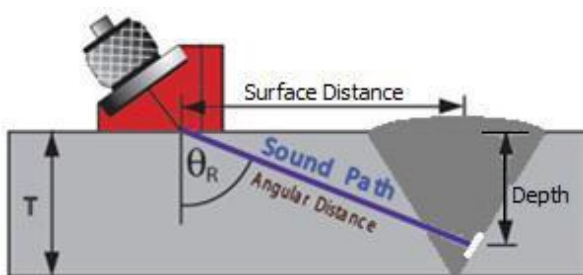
Angle beam probe applied at weld with flaw on flank
